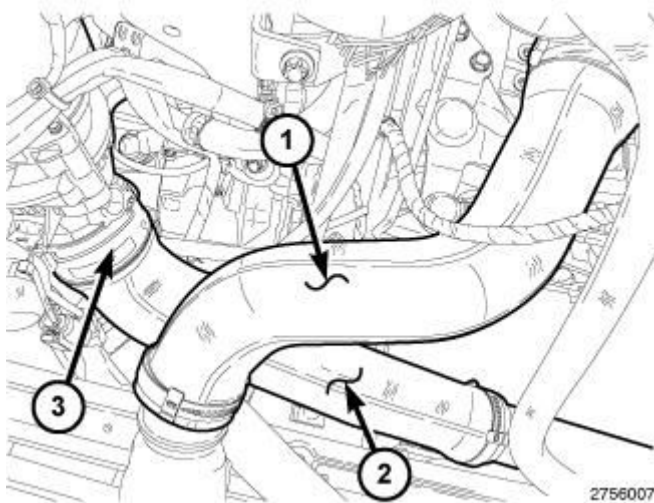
Identifying Front Upper & Lower Air Charge Hose
